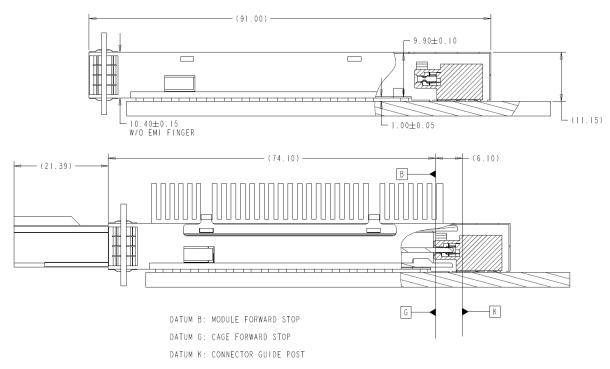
Side view of a 1x1 cage with vertical cage dimensions
